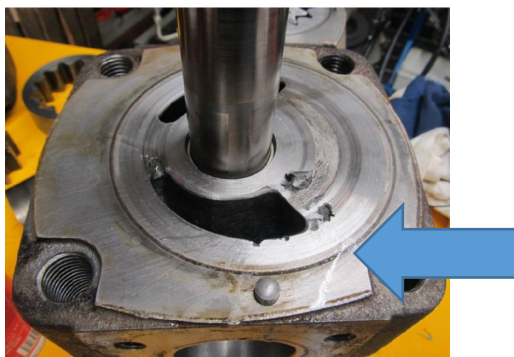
Internal gear pump with damaged valve plate due to cavitation erosion [1].
